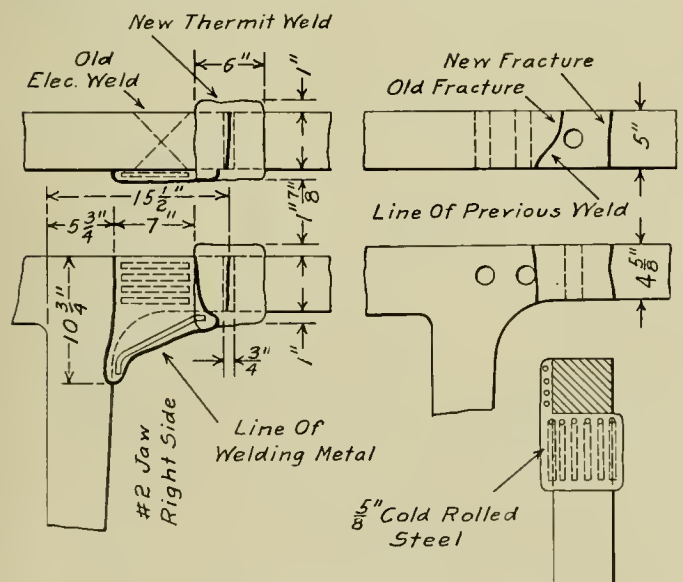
Cast Steel Frame Thermit Weld
